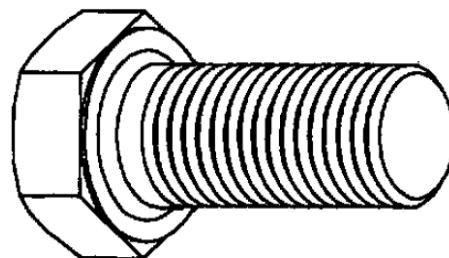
Hexagonal head Cap screw 1" dia-8UNC-2A x2 1/4" long
